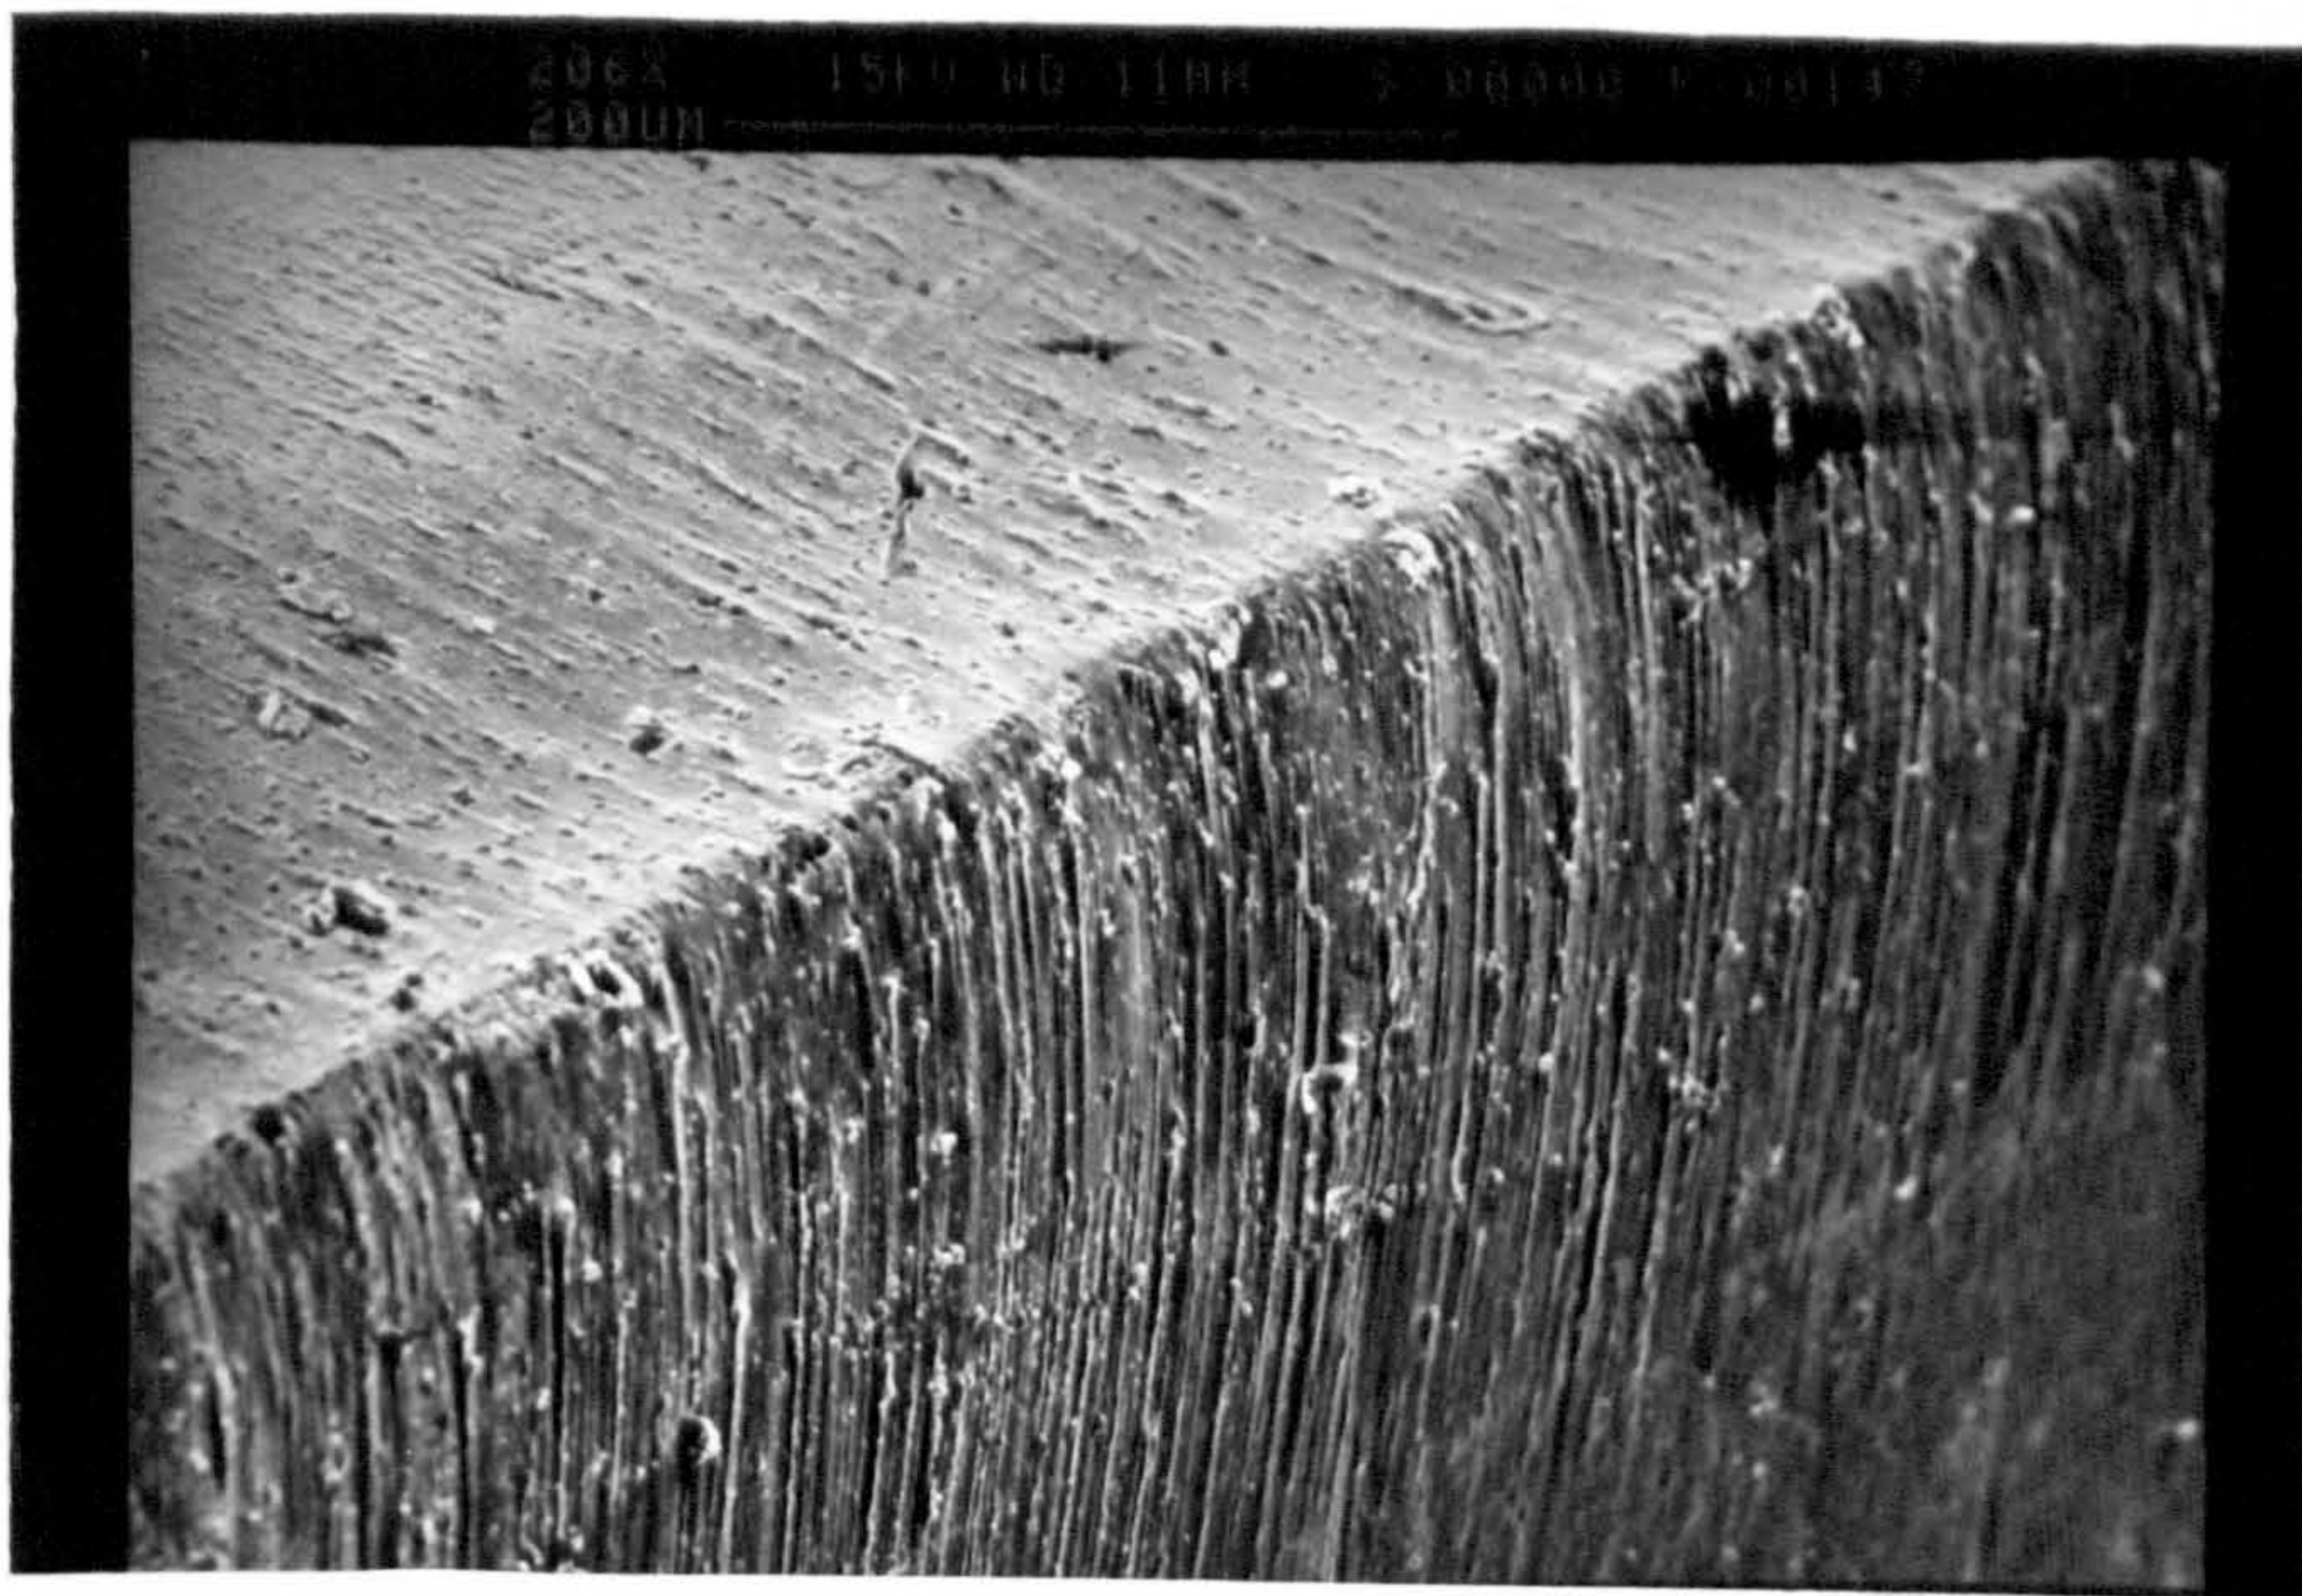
Wear lands of a HSS tool after cutting at a low speed (50 m/min) showing abrasion wear. (Feed = 0.20 mm/rev, cutting time = 1 min)
